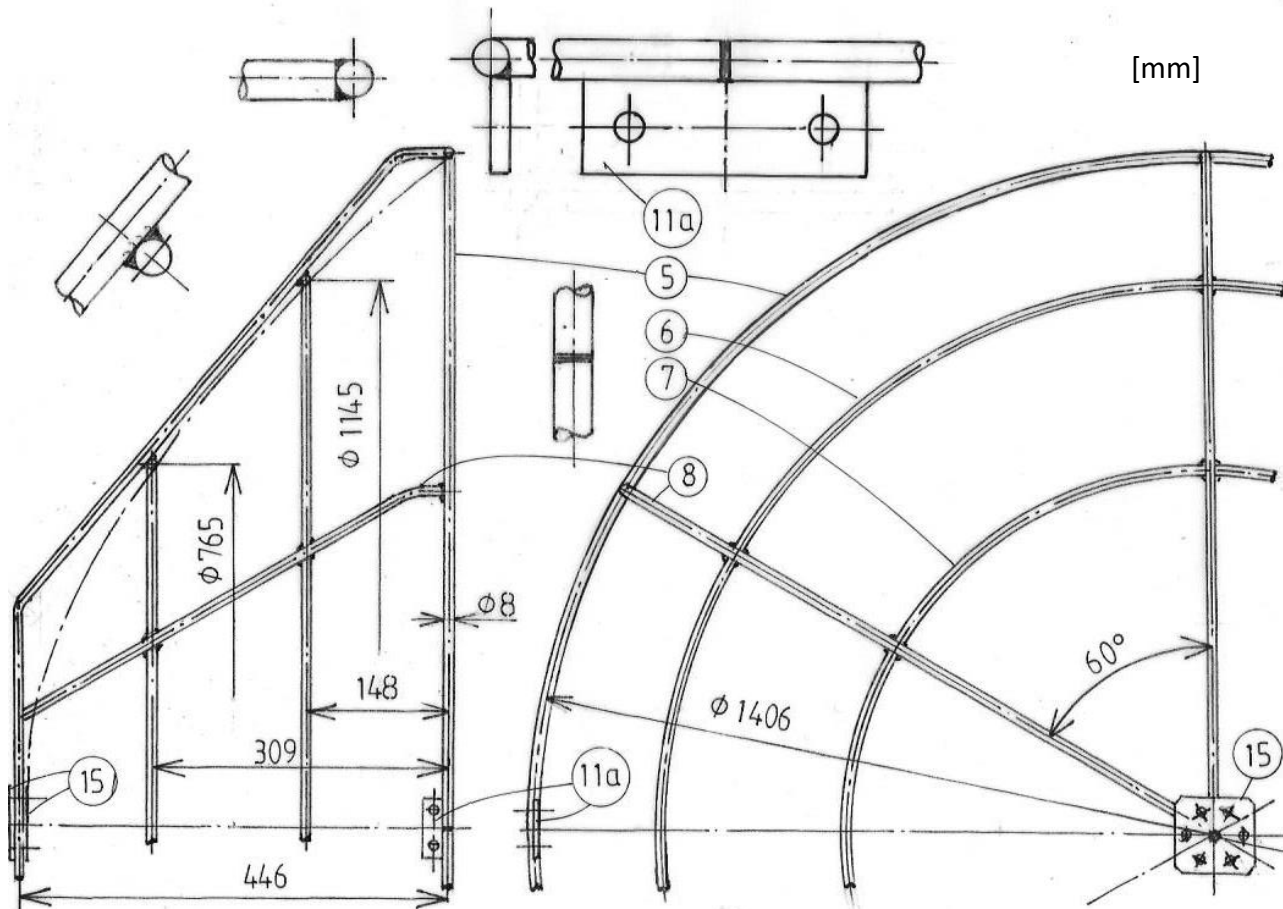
Main Ring (5), Second Ring (6), Third Ring (7), Ring Connector (8), Fastener (11a) for Bearing Plate, Central Connection (15); the two Fasteners (11a) are welded opposite on the ends of the Main Ring Halves in a 30° -position to the Ring Connectors (8); Central Connection (15) consists of two plates; they are applied in the Welding Device (D9).
